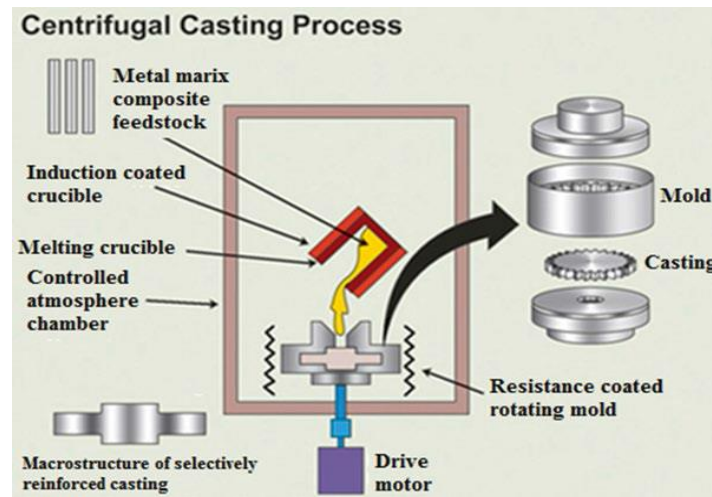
Schematic of centrifugal casting process (<http://www.adityainc.com/casting/centrifugal-casting.html>, 2014)
